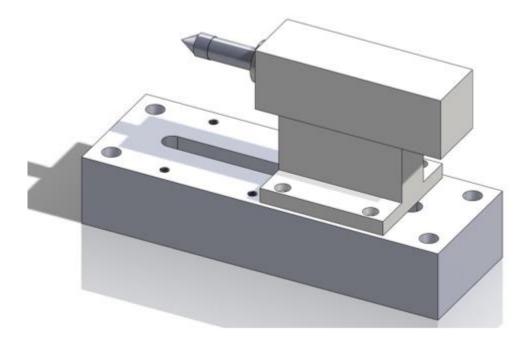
CAD MODEL TAILSTOCK AND ITS BLOCK
